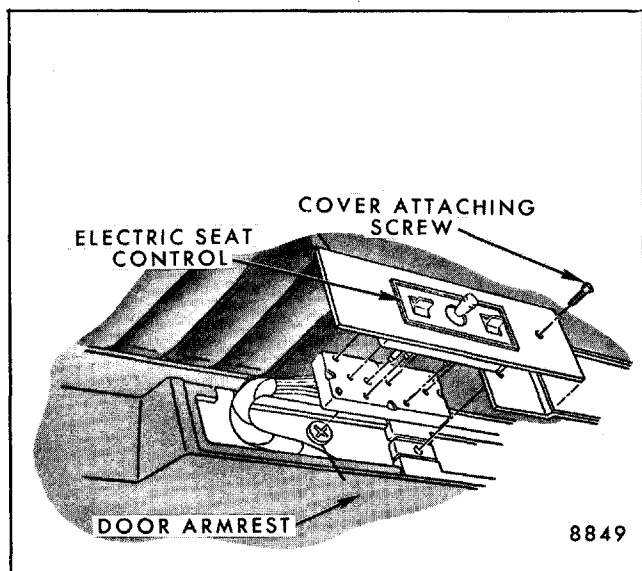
Front Seat Adjuster Control Cover Plate - "K" Style
